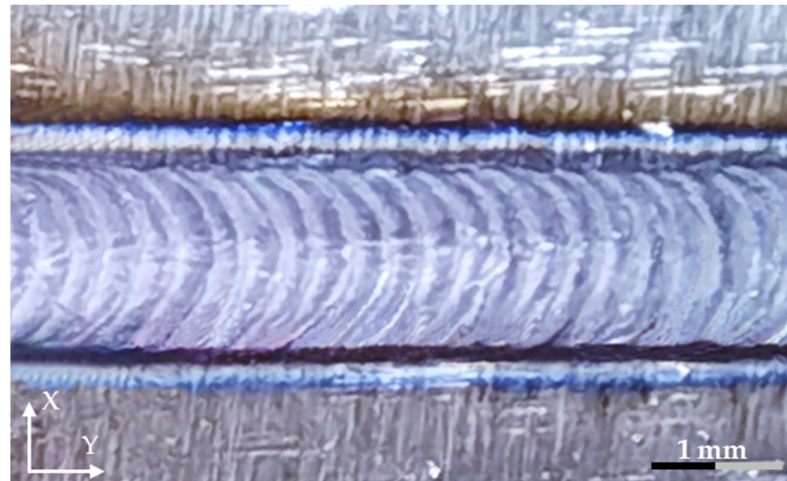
Overall macroscopic morphology of the weld joint (No. 3 sample).
